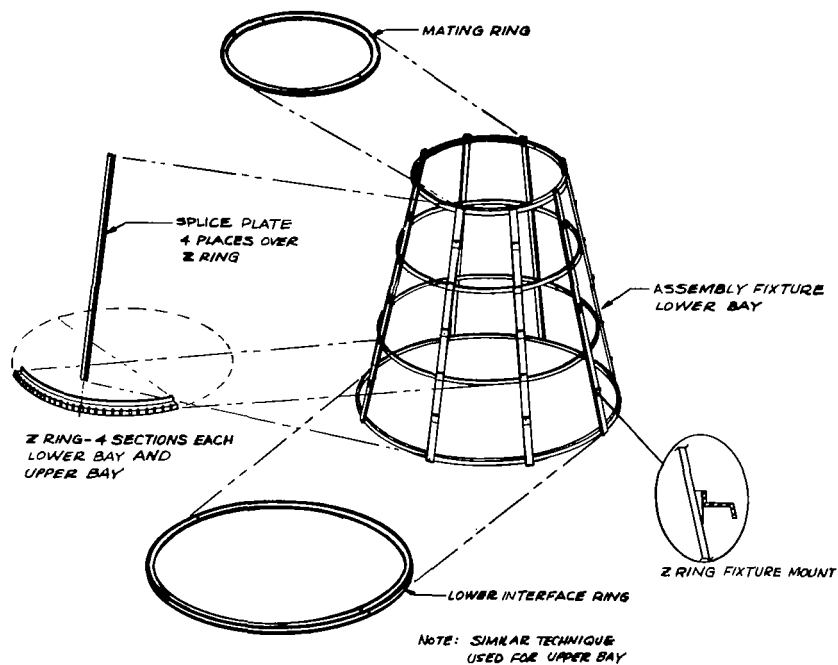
Assembly of Z Rings and Mating Rings on Fixture (Step 3)
